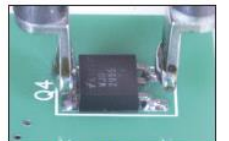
Lower Tips Over Component and Squeeze Handpiece
